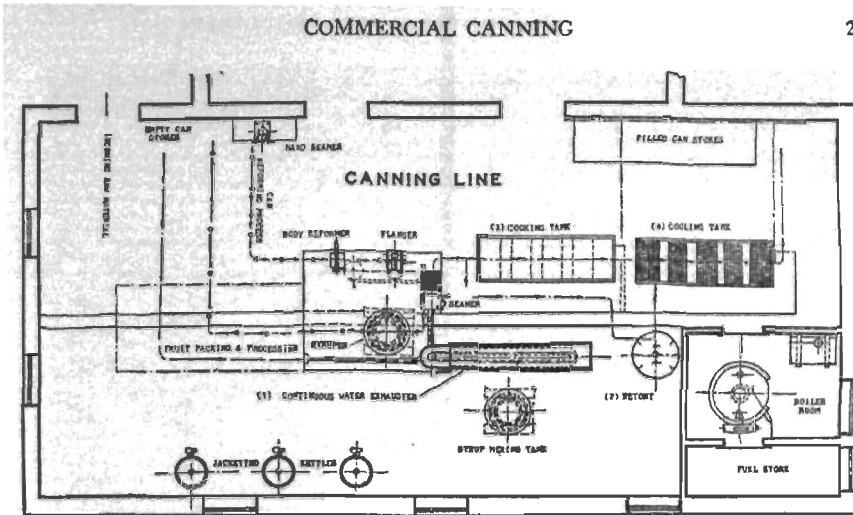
LAYOUT PLAN OF A CANNING LINE
